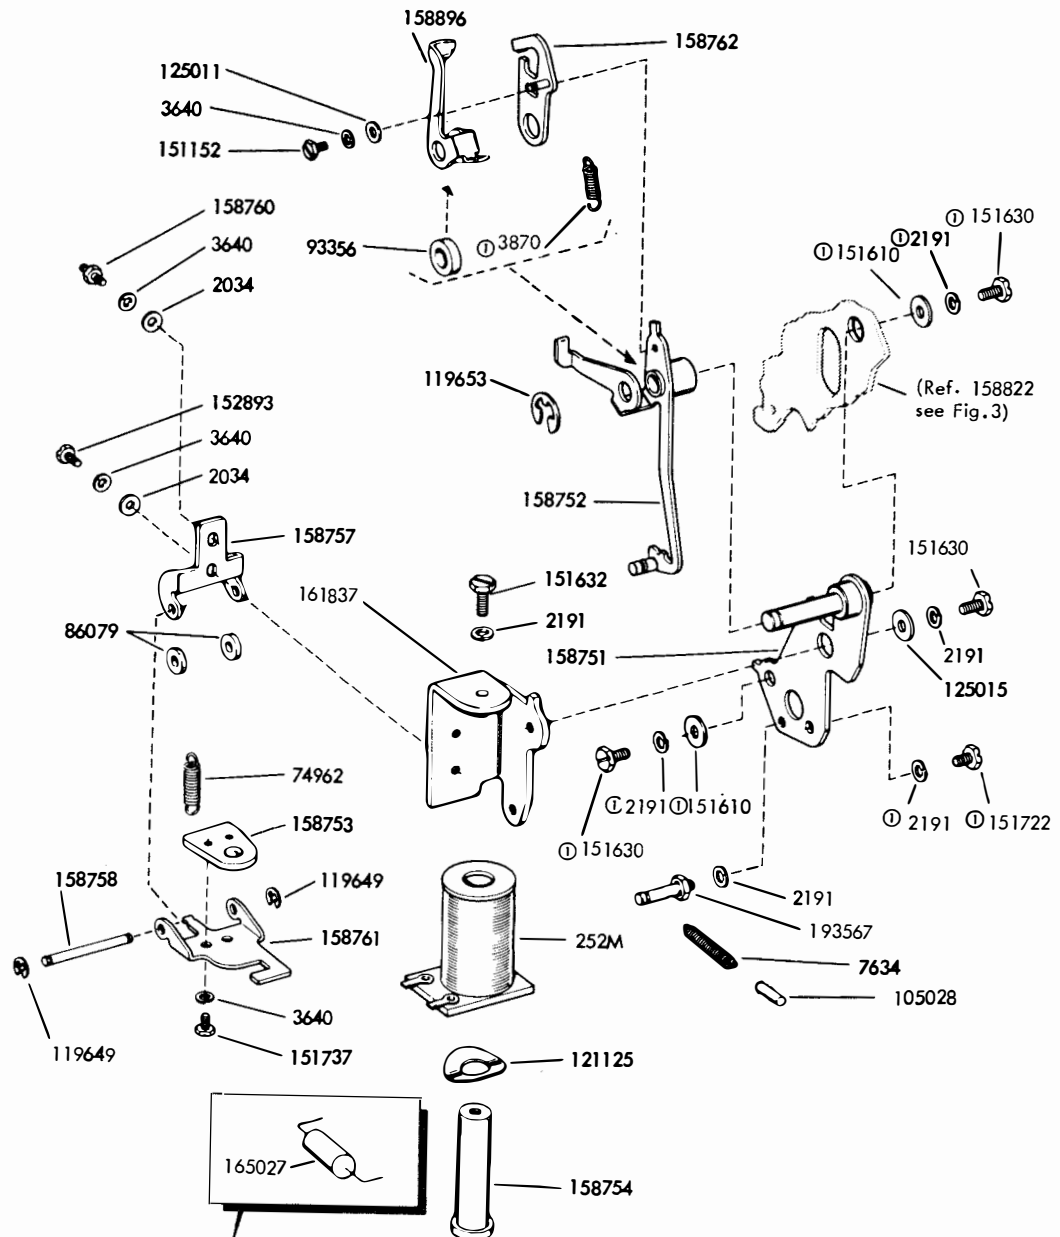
172793 STORING SWITCH ASSEMBLY WITH TRANSFER CODE READING CONTACTS
